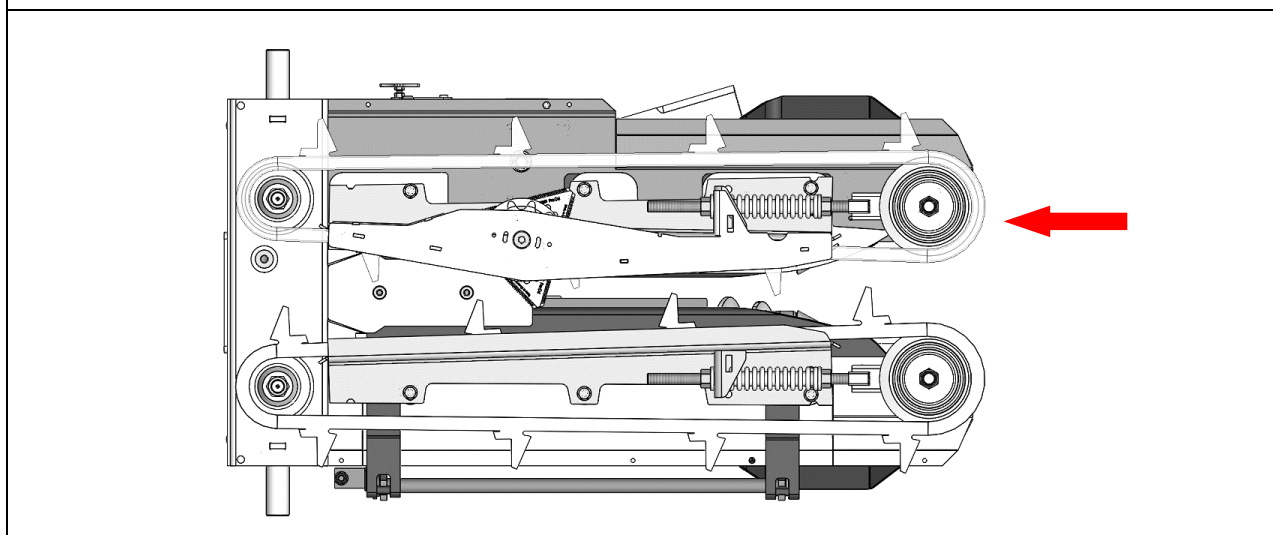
Install the tensioner and the chain in reverse order and tension the chain.
